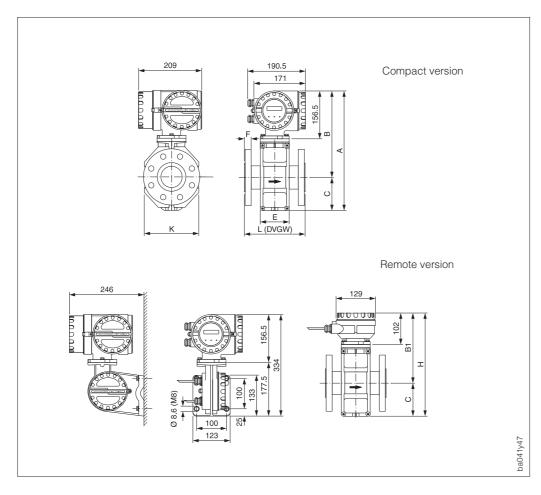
Dimensions Promag 31 F (DN 15...300)
